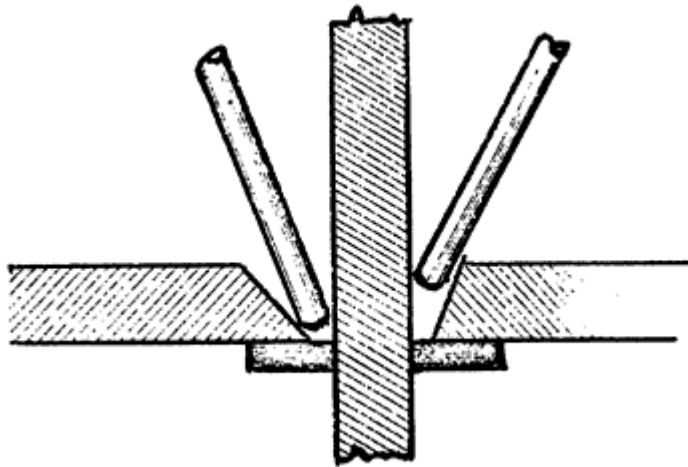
How the joint weld preparation angle on the root gap can limit access for welding. On the left hand side a 45° angle is adequate to reach the root area but on the right hand side with $22\frac{1}{2}^\circ$ the weld metal will bridge without fusing into the root, unless the root gap is increased.
